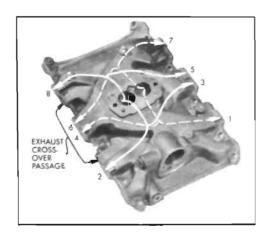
Intake Manifold Distribution - V-8 Engine
